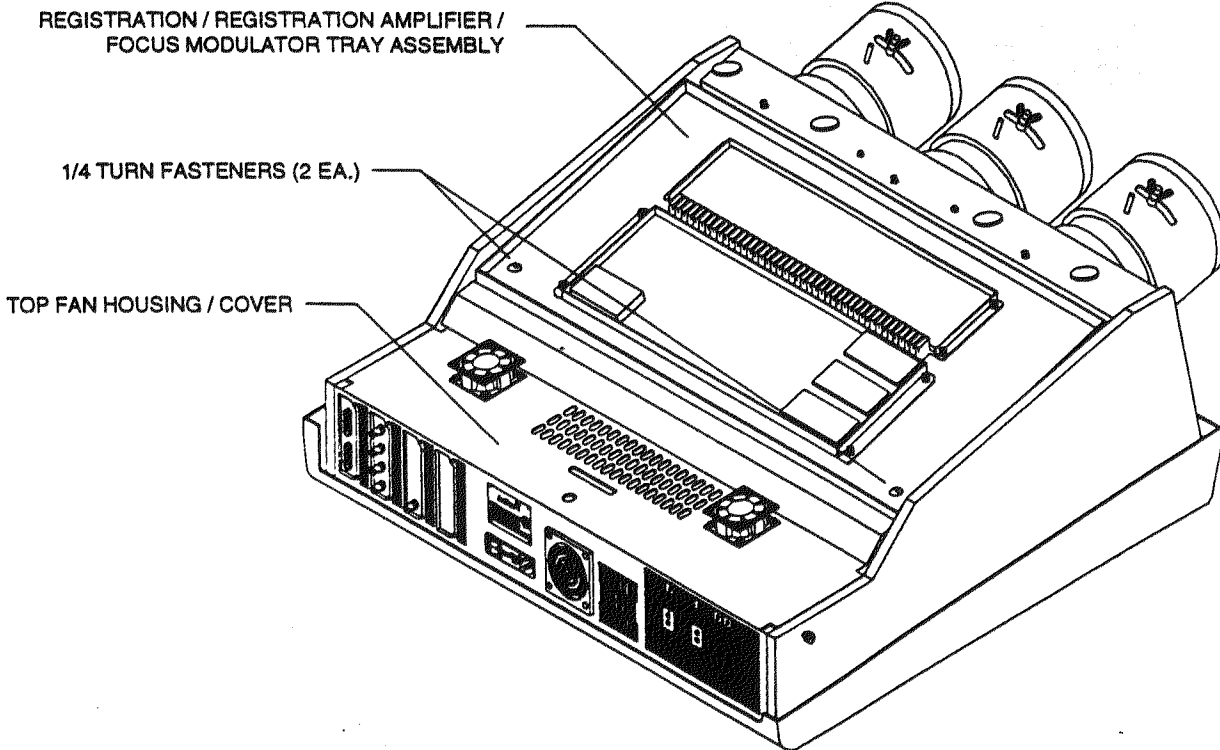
ACCESSING THE YOKE INTERFACE BOARD.
